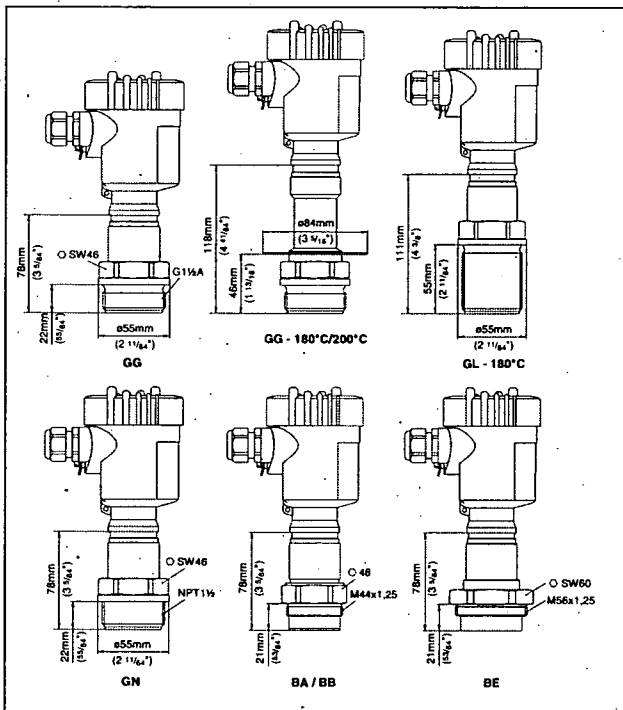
VEGABAR 65, threaded fitting: GG = G1 1/2 A, GL = G1 1/2 A thread length 55 mm, GN = 1 1/2 NPT, BA/BB = M44x1.25; BE = M56x1.25
